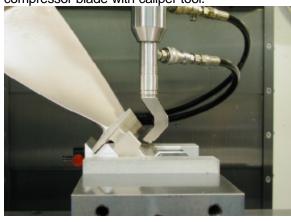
Single point tool LPB processing of the dovetail of Ti-6-4 compressor blade.
